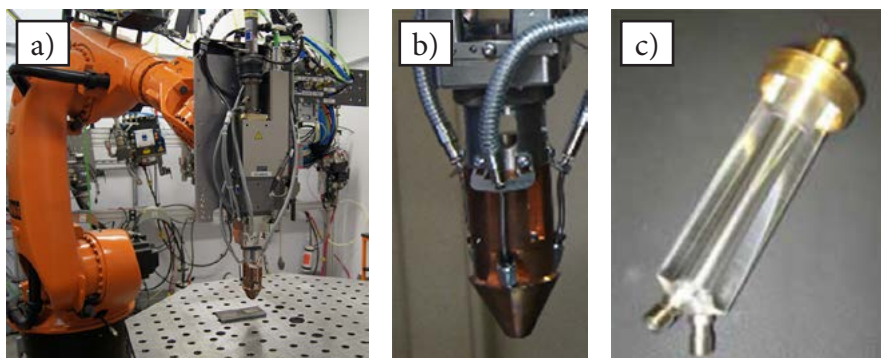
Head for overlay welding installed on the robotic laser station (a), an ND16 three-way process nozzle (b), powder distributor (c)
